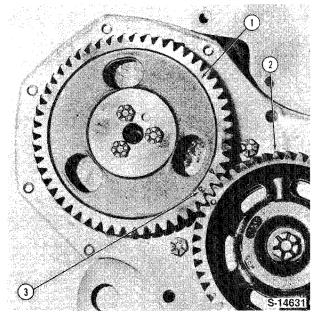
Injection Pump Drive Gear To Camshaft Drive Gear Timing 1. Pump Drive Gear 3. 3-Cylinder Timing
